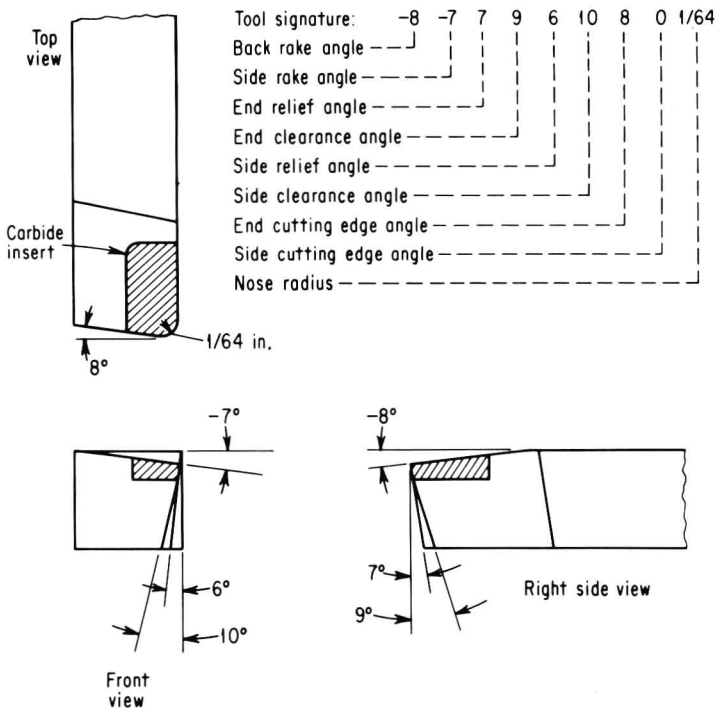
A straight shank, right-cut, sintered-carbide tipped, single-point tool. Rake angles are negative and secondary clearance angles on end and side are illustrated.
